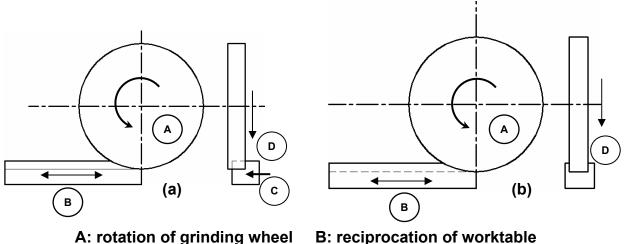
Horizontal spindle reciprocating table surface grinder
